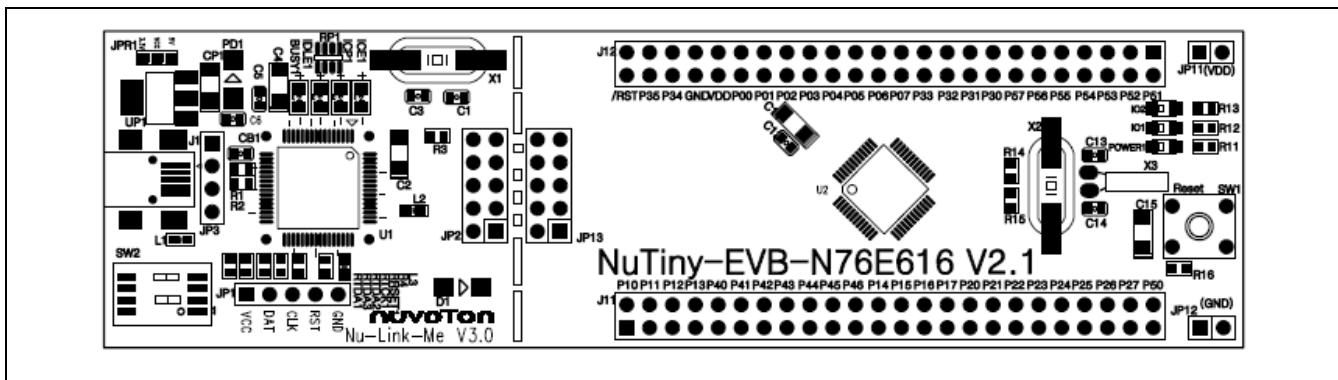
NuTiny-SDK-N76E616 PCB Placement
